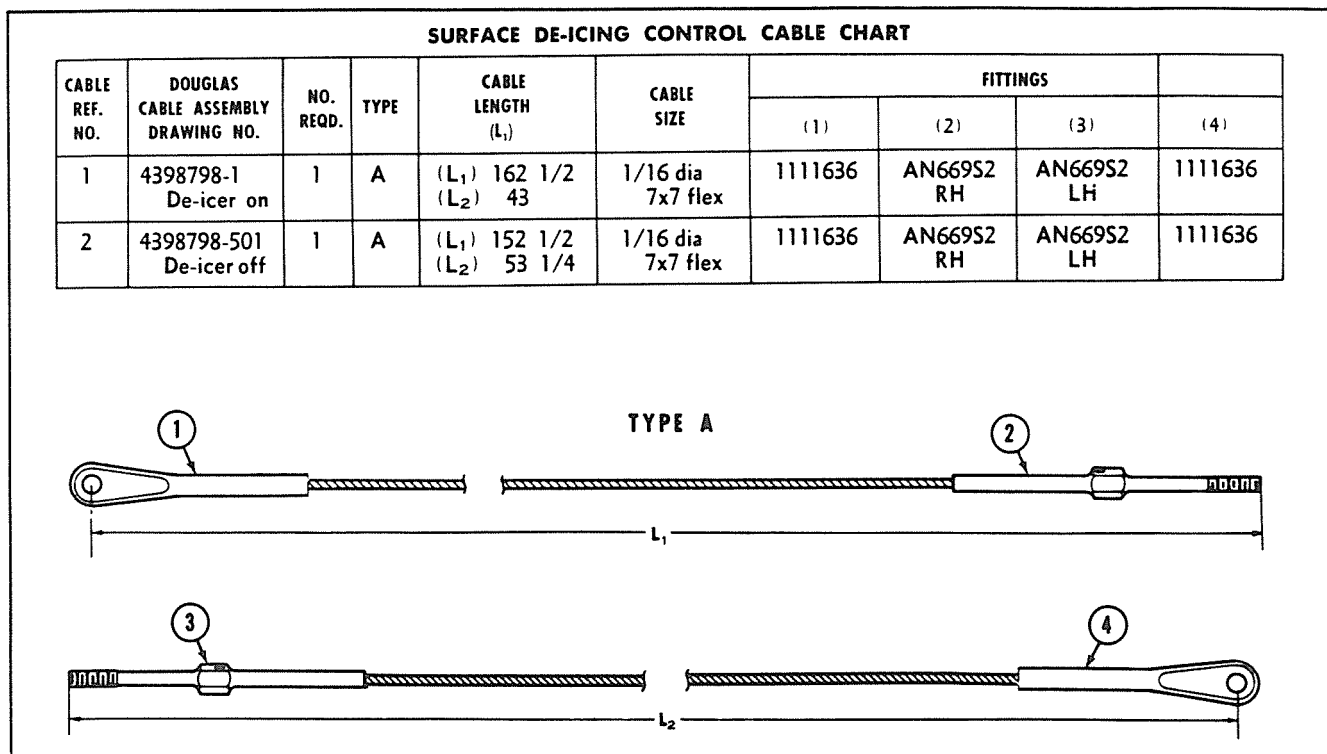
(Sheet 4 of 4 Sheets). Surface De-Icing Control System – Cable Chart and Cable Assemblies
